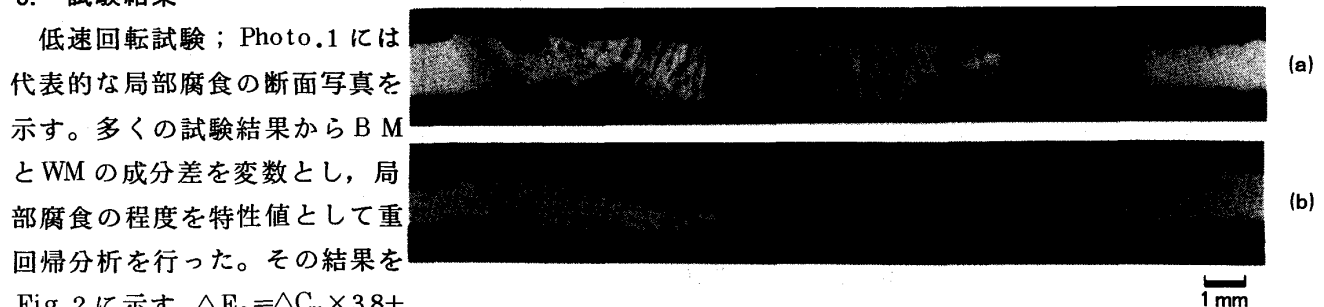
Typical local corrosion of welds (a) HAZ corrosion (b) WM corrosion
